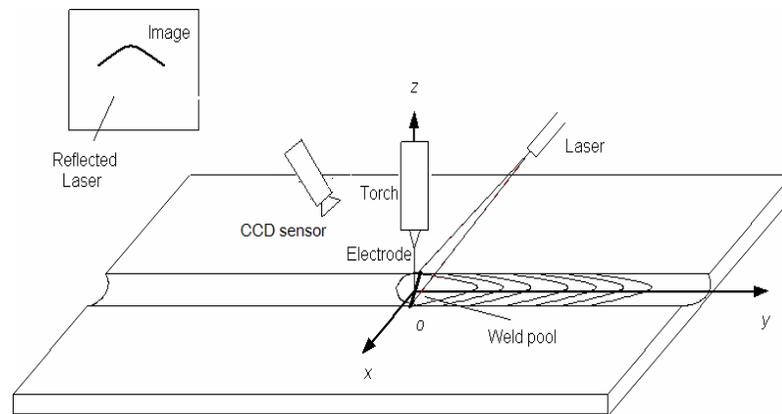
, Structured light technology used in weld pool observation [34]
